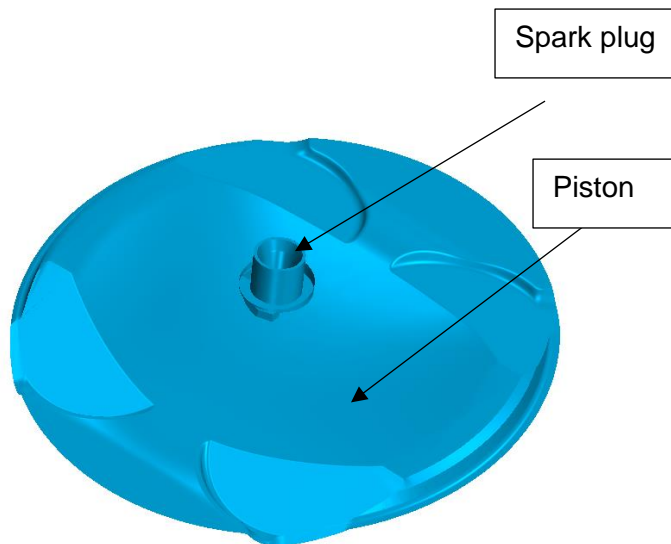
12.5 CR, Engine-B piston shape placed relative to the spark plug geometry.
